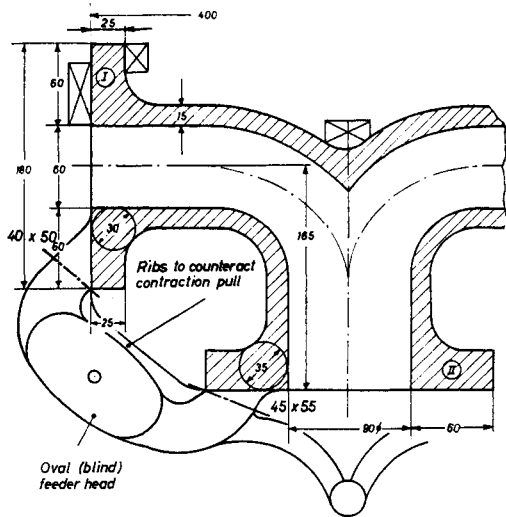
Feeder neck of a distributor casting. Possibility 2: feeder more easily removable than in 1 (Fig. 66a).
